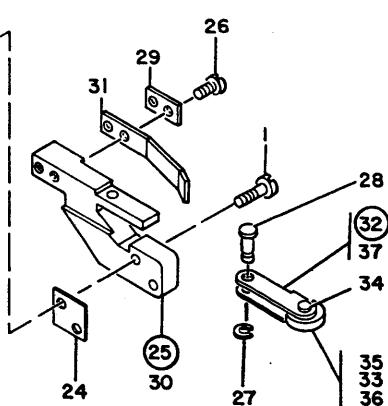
CARRIAGE AND CARRIAGE HOUSING ASSEMBLY. SEE LIST 9.
